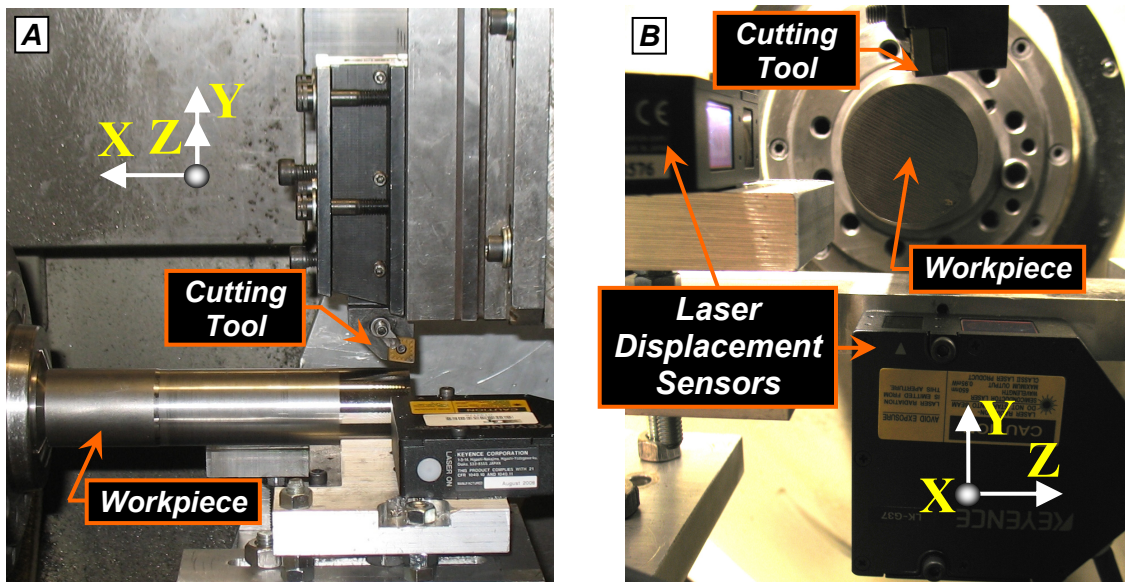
The experimental setup used to measure the workpiece displacement over time during turning. (A) Front view; (B) side view.
